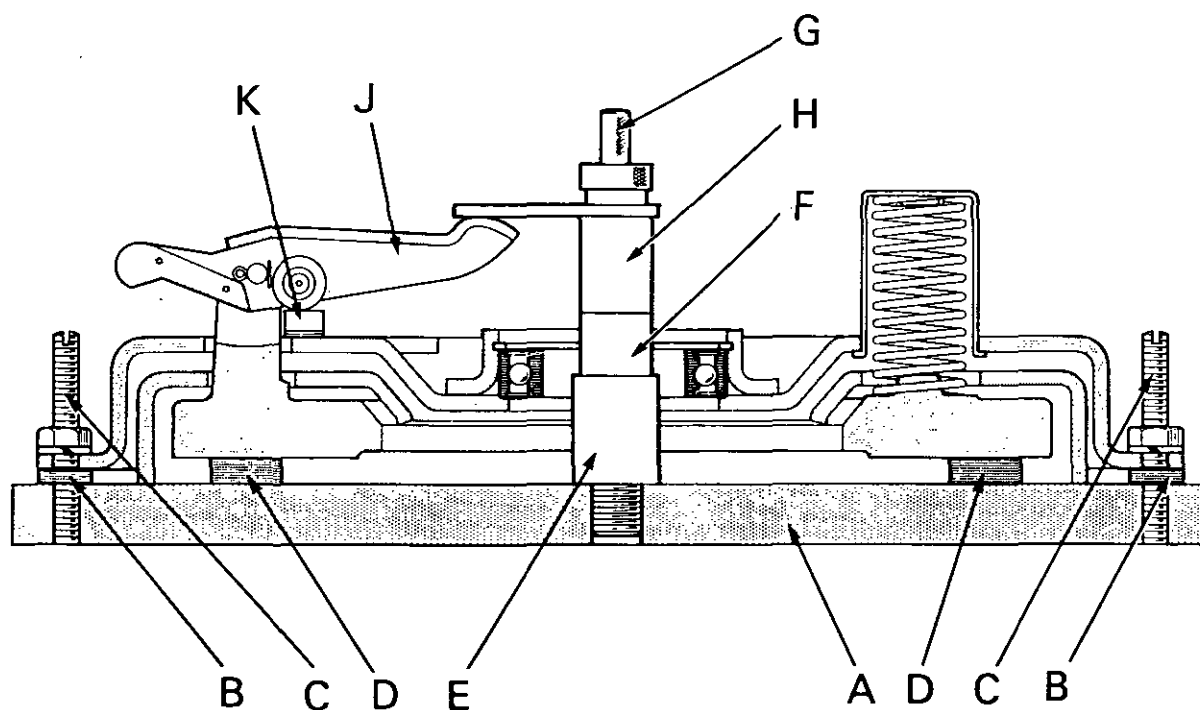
CHECKING RELEASE LEVER HEIGHT — BORG AND BECK
